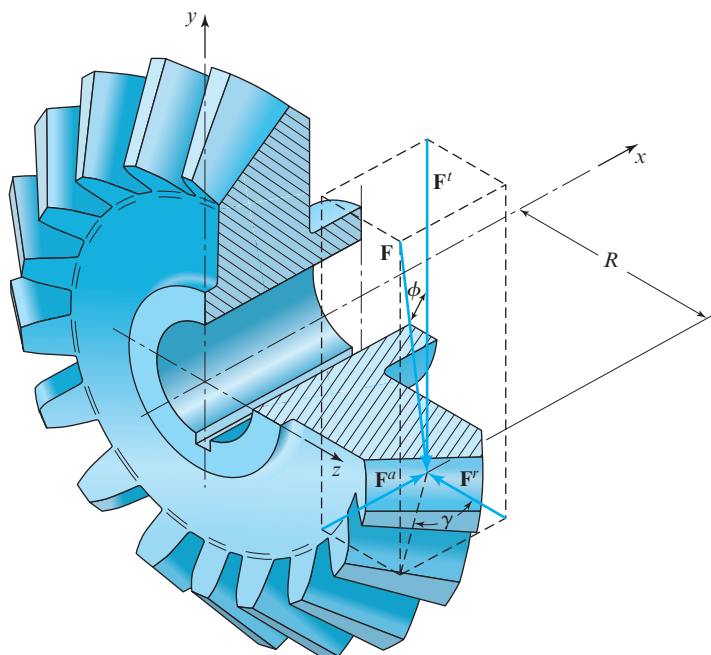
Force components on a straight-tooth bevel gear at the tooth contact point.
